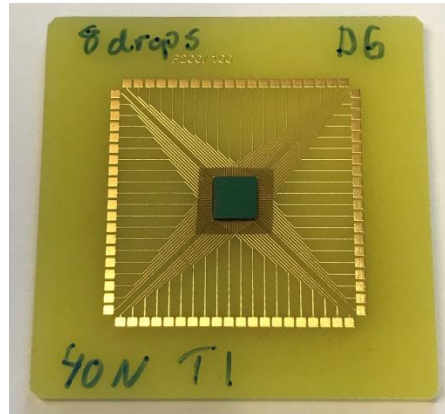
Bumped test chip placed and bonded over the PCB substrate using flip-chip bonding. [67]
